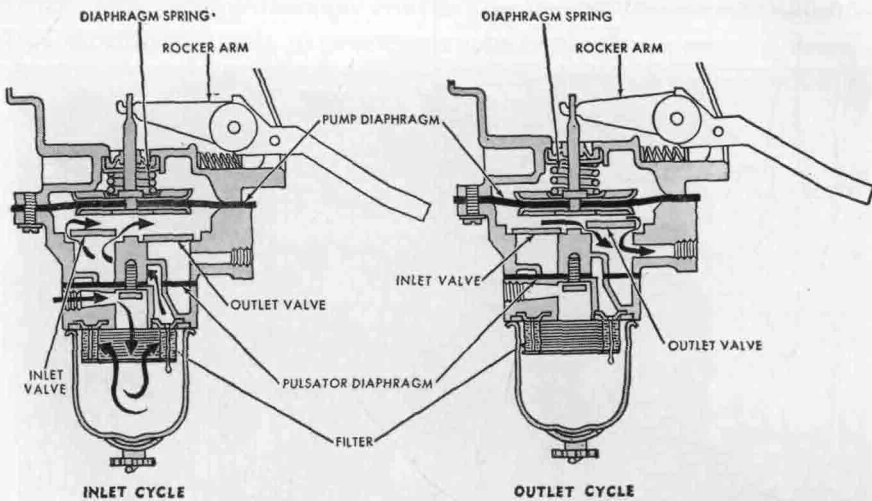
Sectional views of a fuel pump showing the inlet and outlet cycles. (Mercury Division of Ford Motor Company)
